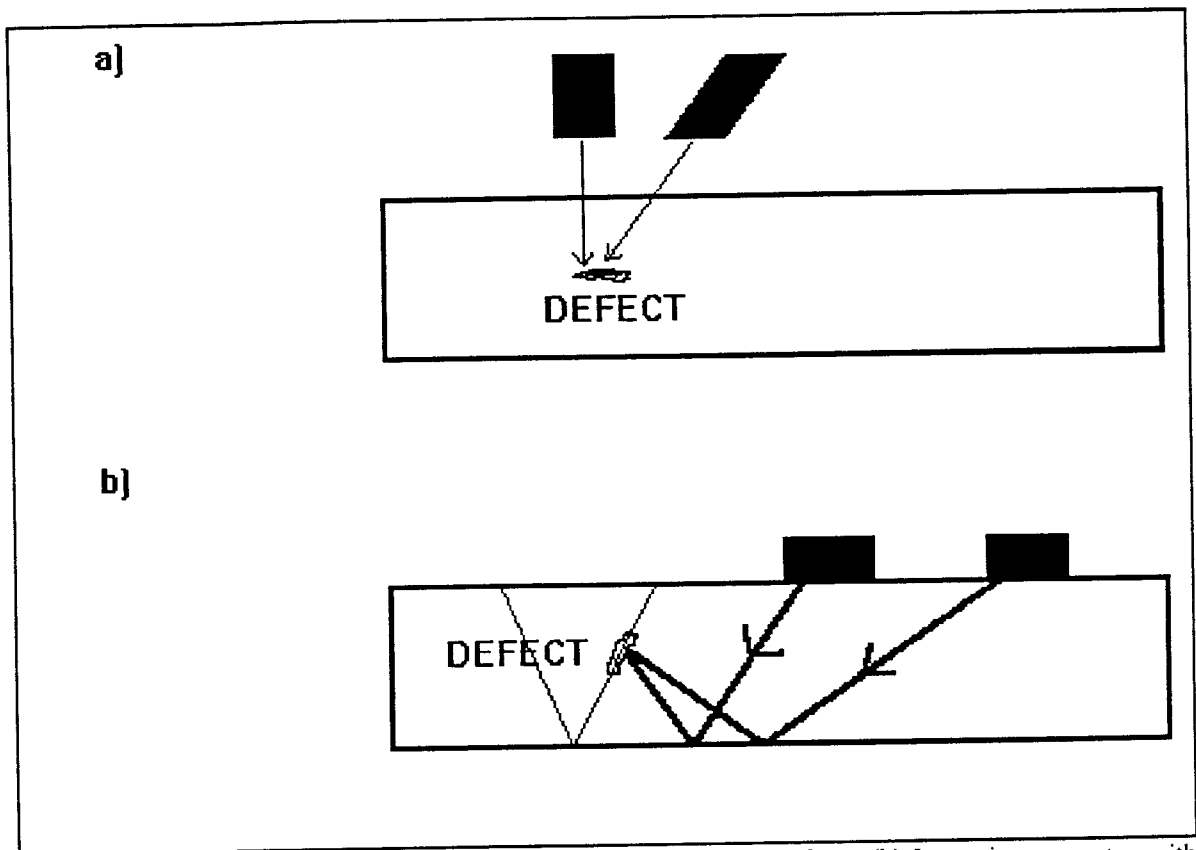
(a) Inspection geometry with immersion probe on planar defects. (b) Inspection geometry with angle contact probes for V welds with bottom wall reflection (one skip).
